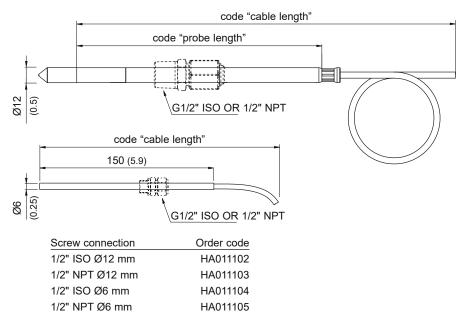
Type T17, two probes, pressure tight up to 20 bar (300 psi) and 180°C (356 °F), with optional cut in fitting
